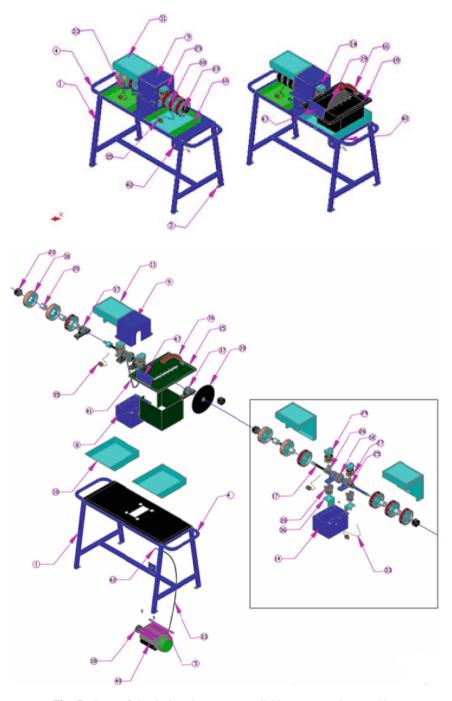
Parts of the designed gemstone polishing cum cutting machine
